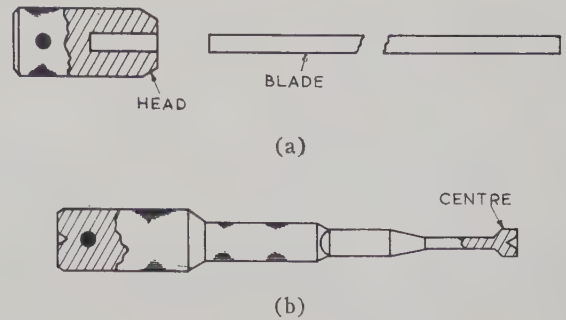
Manufacture of permanent formers; (a) rectangular mandrel made separately and brazed into its head, (b) complex former with various sections made in one piece. The centre at the free end is removed in a final operation.
